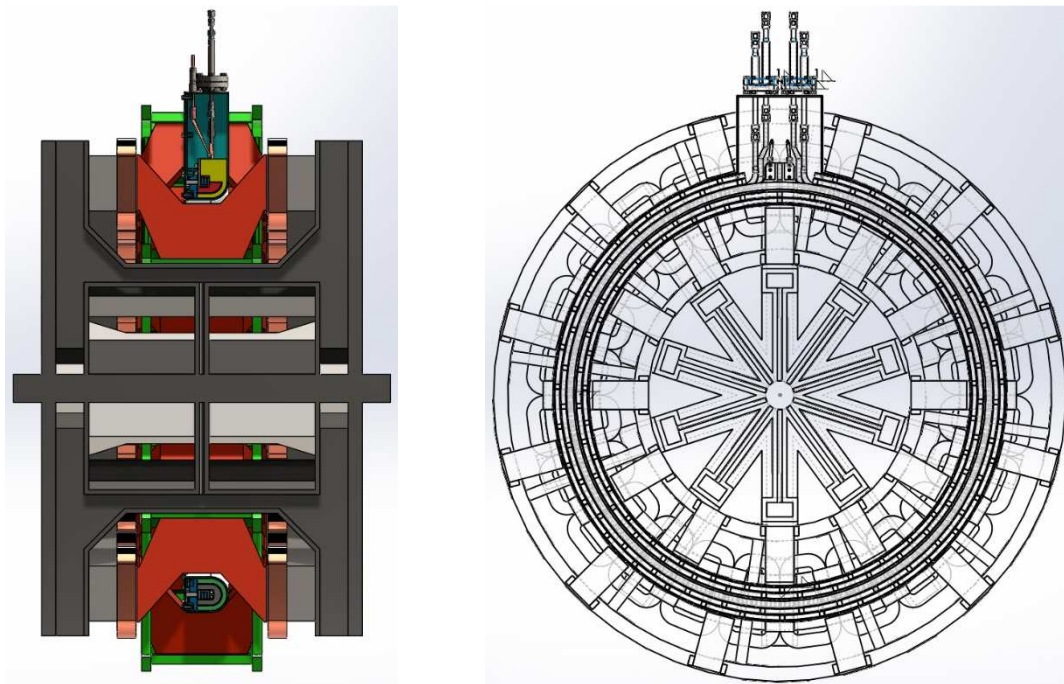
Complete 30 kW prototype machine including cryostat, HTS field winding, armature coils and support structure
